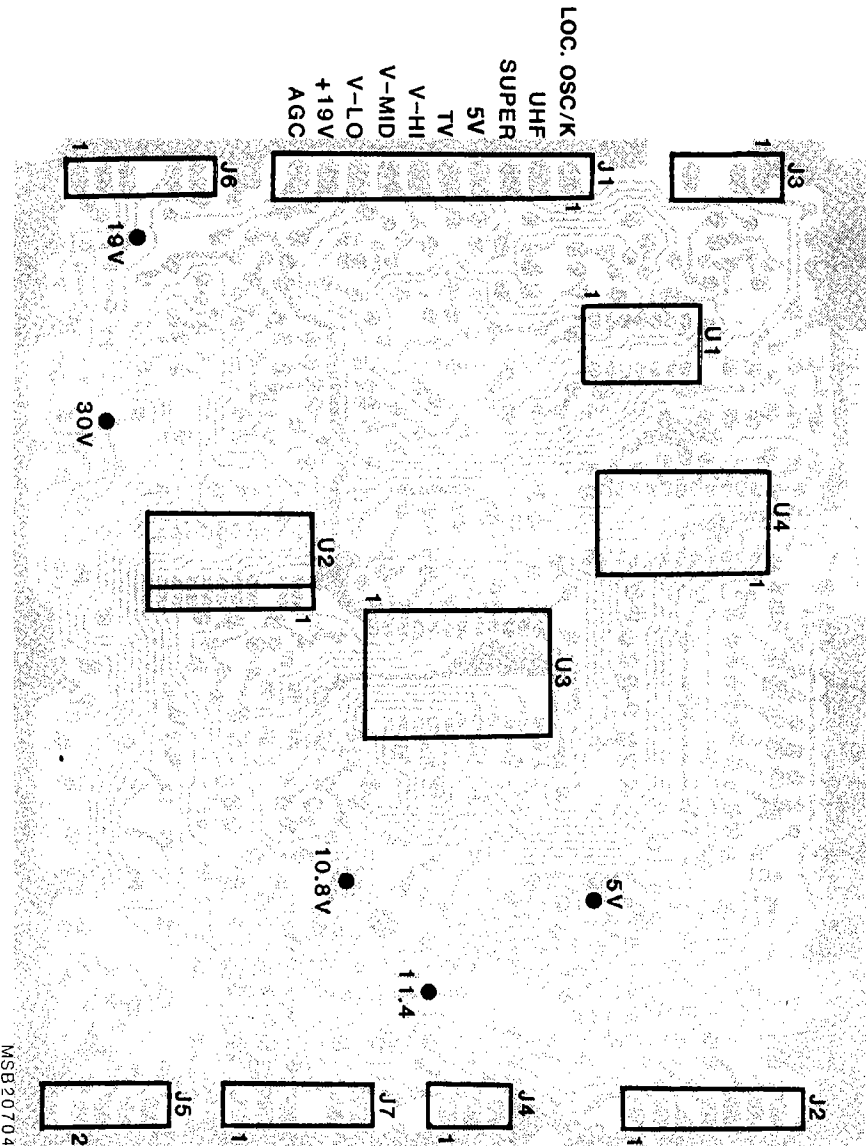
MSC 027 F.S. Servicing Circuit Board Bottom View
